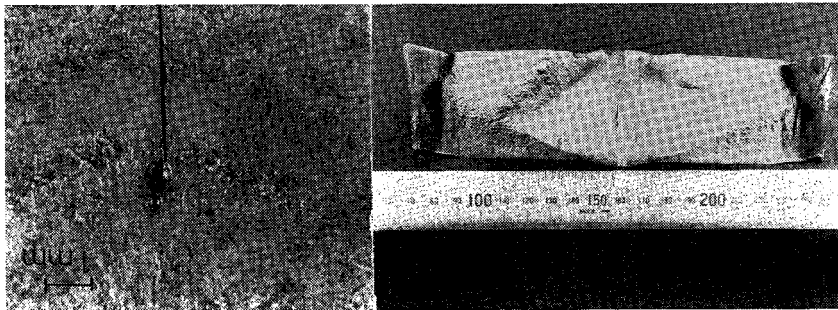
Fracture Surface of T-2 Large Specimen.
